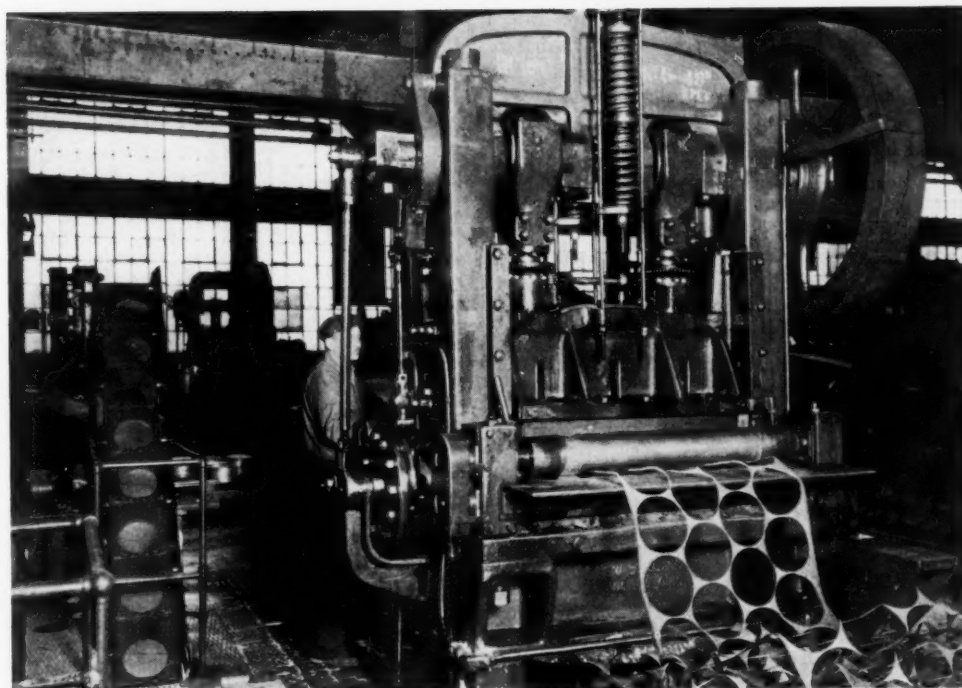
BLANKING DISKS FROM WHICH STATOR AND ROTOR PUNCHINGS ARE MADE
